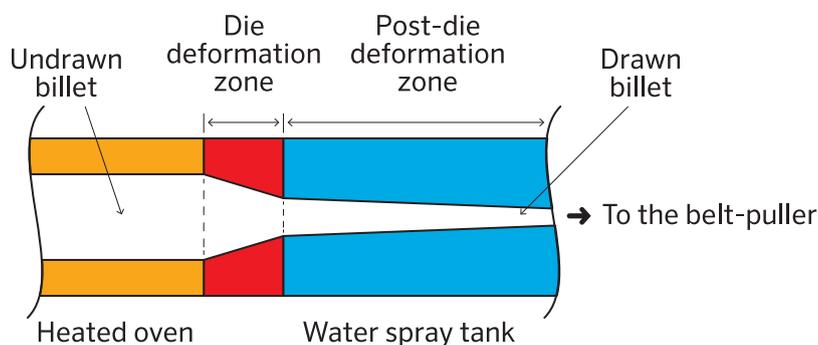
Die-drawing of extruded billets through a heated die may be used to produce a highly oriented and expanded or stronger and lighter product.
